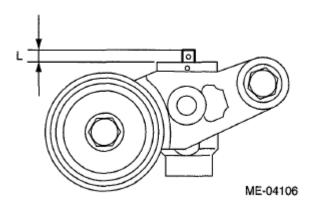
Identifying Protrusion Amount Of Adjuster Rod L Courtesy of SUBARU OF AMERICA, INC.
